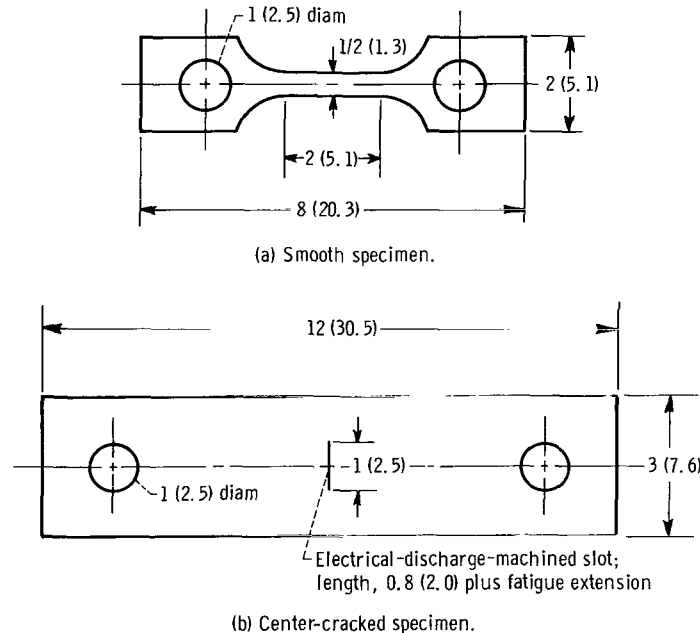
Sheet specimens. (All dimensions are in inches (cm).)
